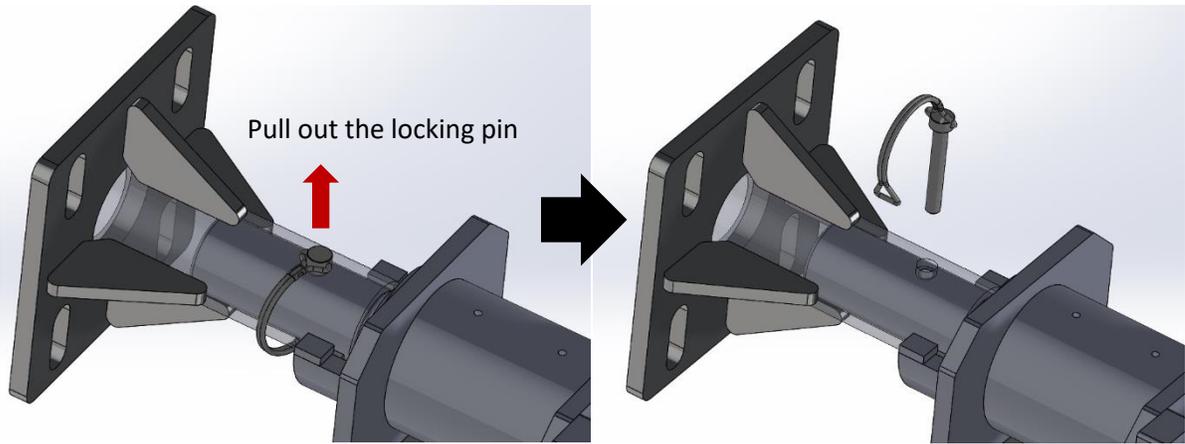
Operating Procedure for Welding Fixture Changeover, Pull Out Locking Pin, Idle End
